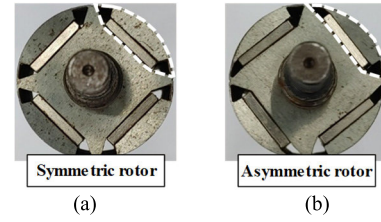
Manufactured rotor shape (a) symmetric rotor and (b) asymmetric rotor.
